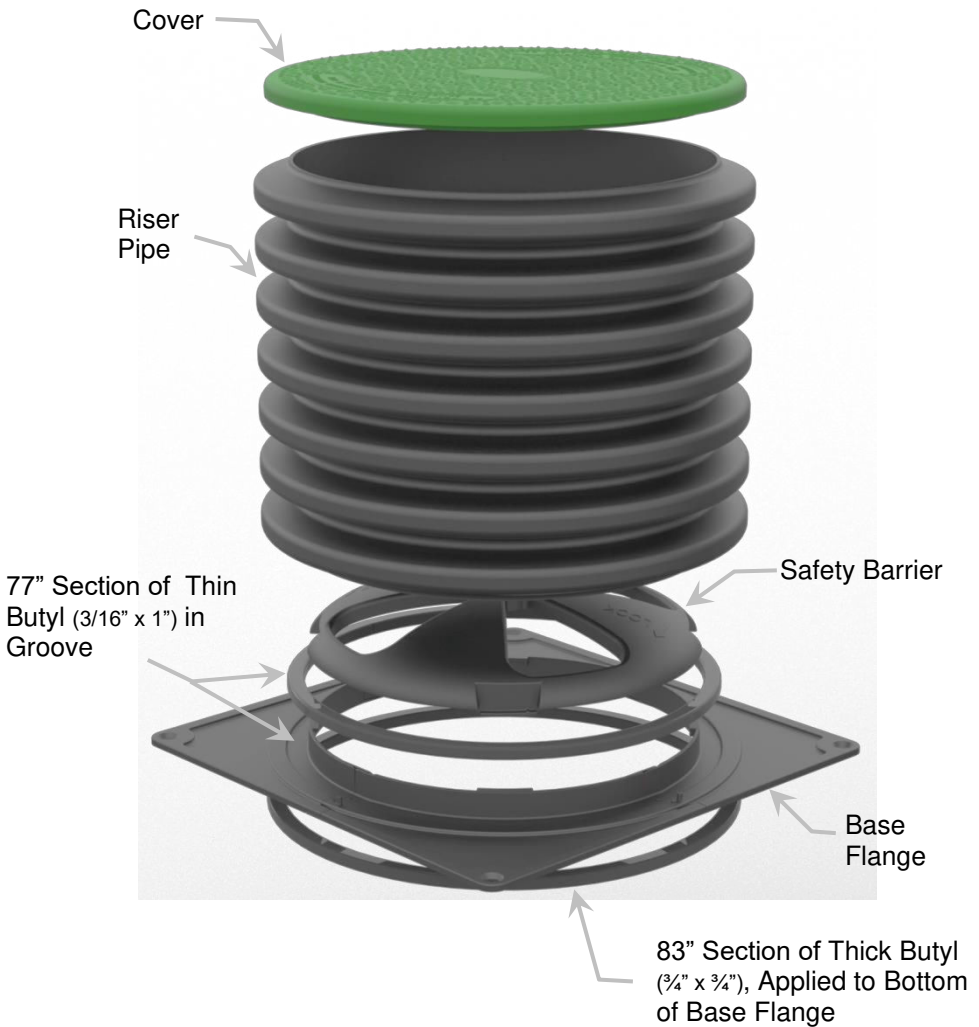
illustrates typical construction of septic tank riser kits 20" – 38" tall.
